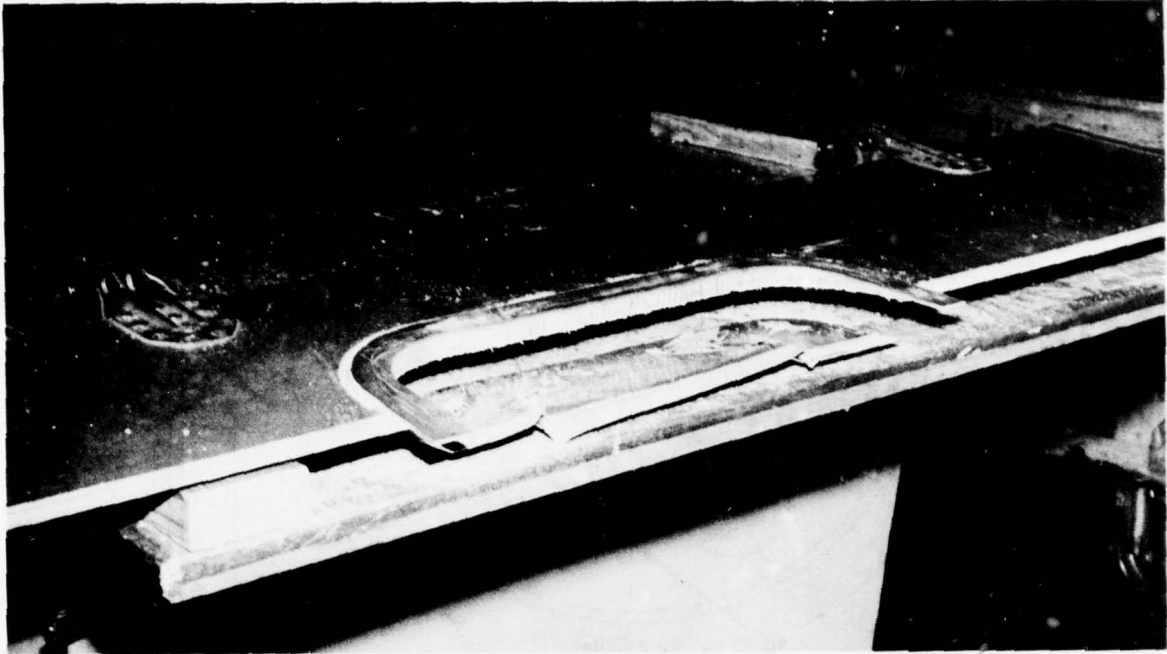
Metal-Strip Template Used as a Router Guide to Remove Damage from a Spoiler Trailing Edge
